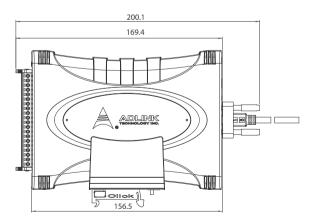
Module, Stand, & Wall Mount Kit Side View (w/ Connections)
